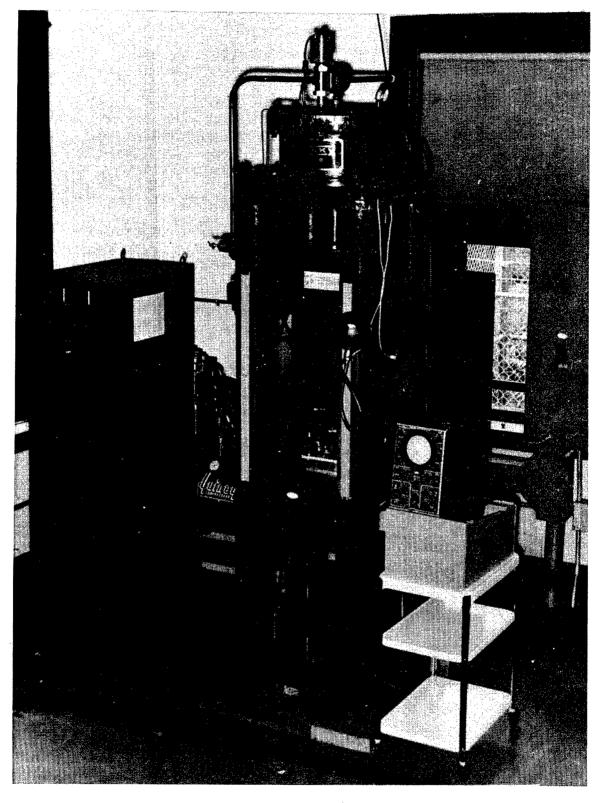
Flush Sintering Machine and Auxiliary Equipment
